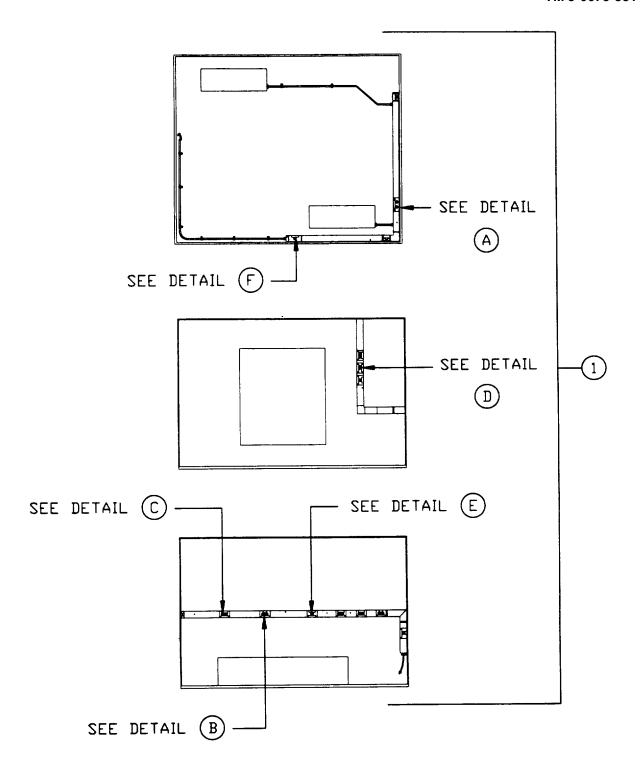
ELECTRICAL ASSEMBLY (SHEET 1 OF 7)
